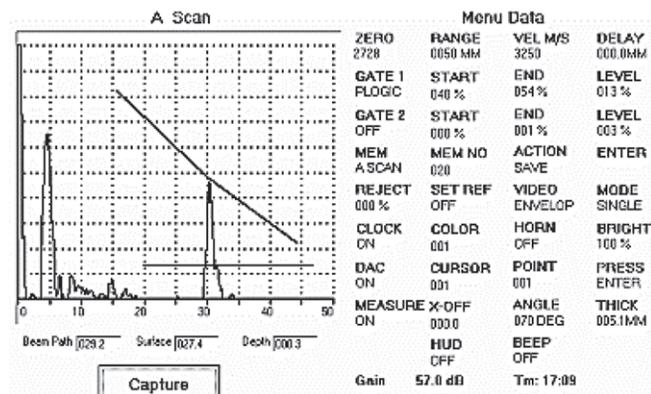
In MIG welding, an echo at 45 mm from the edge of the work piece indicates insufficient penetration
